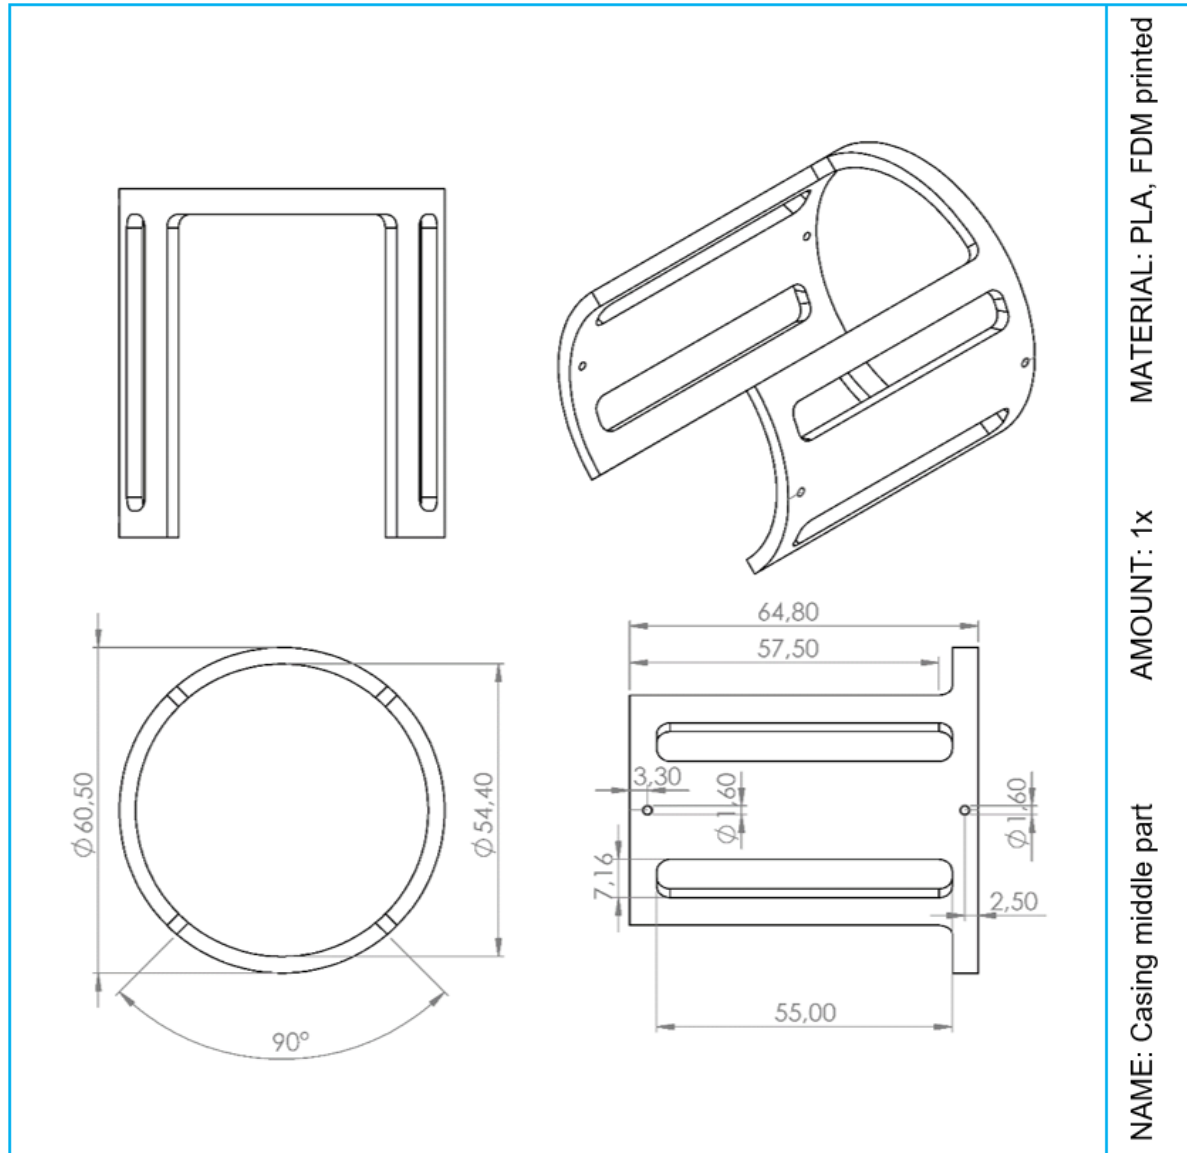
Construction drawings of the casing middle part - 3D Printed prototype
